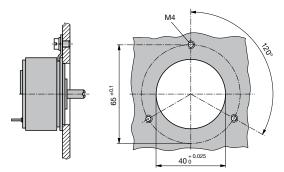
Drilling plan for fixing with 3 spring clamps.
